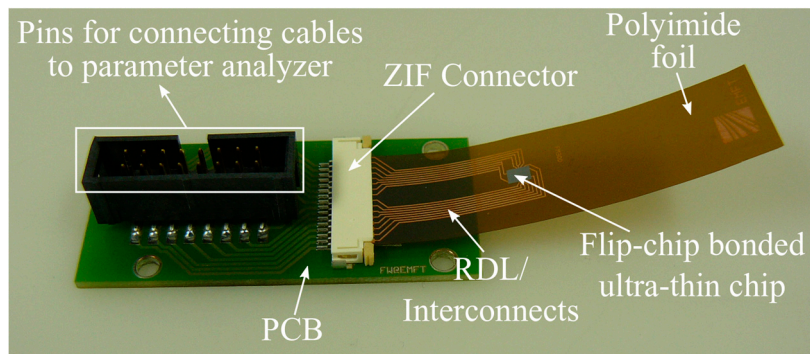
A chip-foil package test sample connected to the PCB via the zero-insertion force (ZIF) connector.
